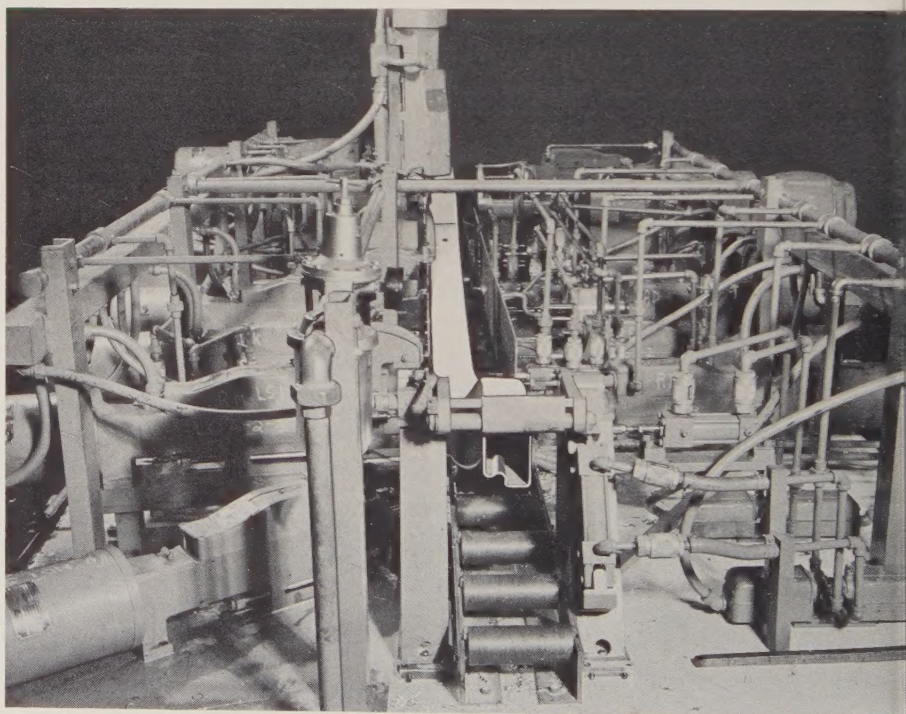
The drilling of holes necessary for the attachment of clips, body brackets, and other items on each side of either a left-hand or right-hand rail is performed by an automatic, horizontal drilling machine. This is a view of a typical final set-up.
